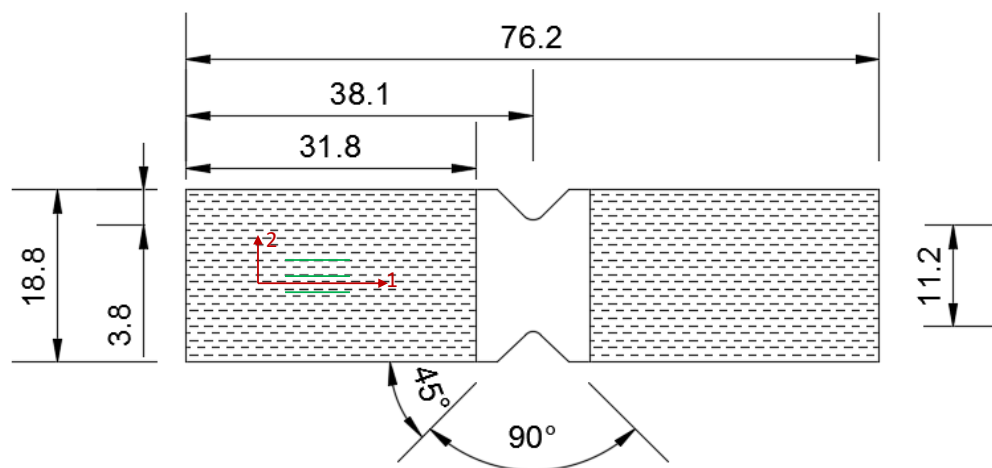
ASTM D5379 Recommended Iosipescu Shear Specimen Nominal Dimensions and Layout (All Dimensions in mm)
